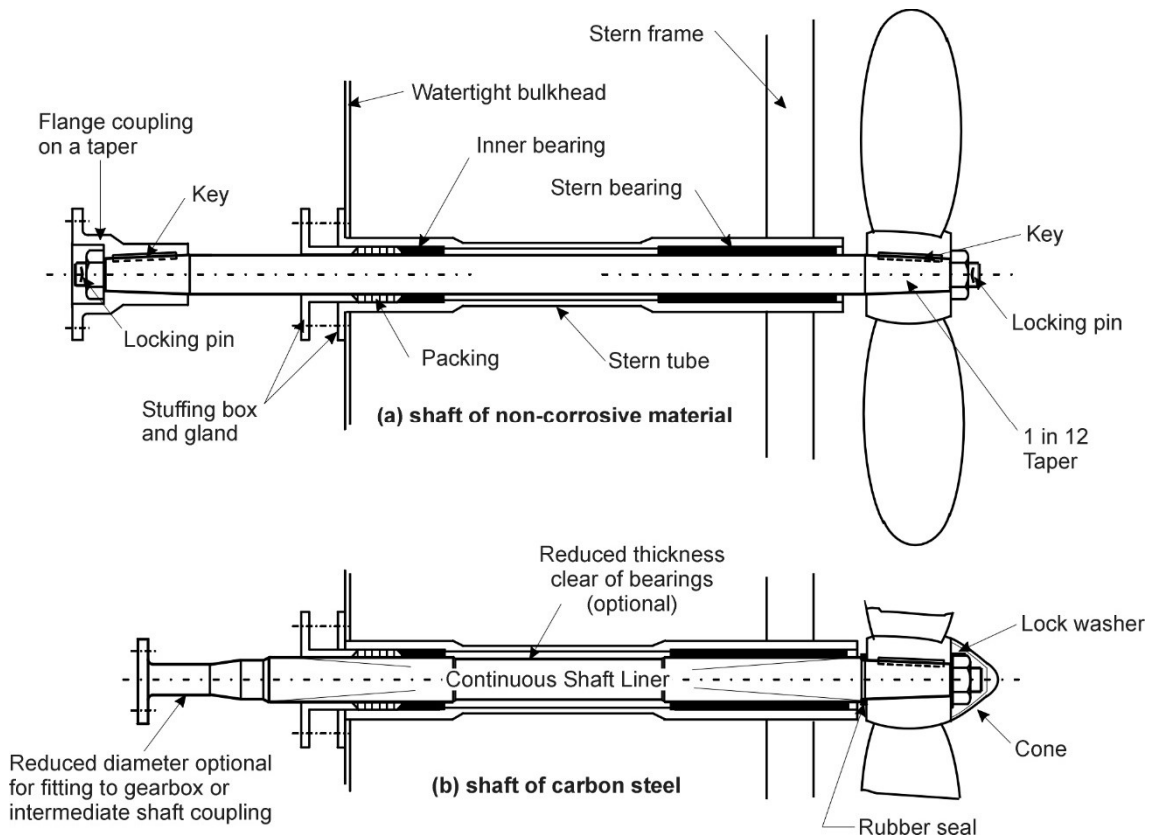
Typical propeller shaft, stern tube, stern bearing and gland
